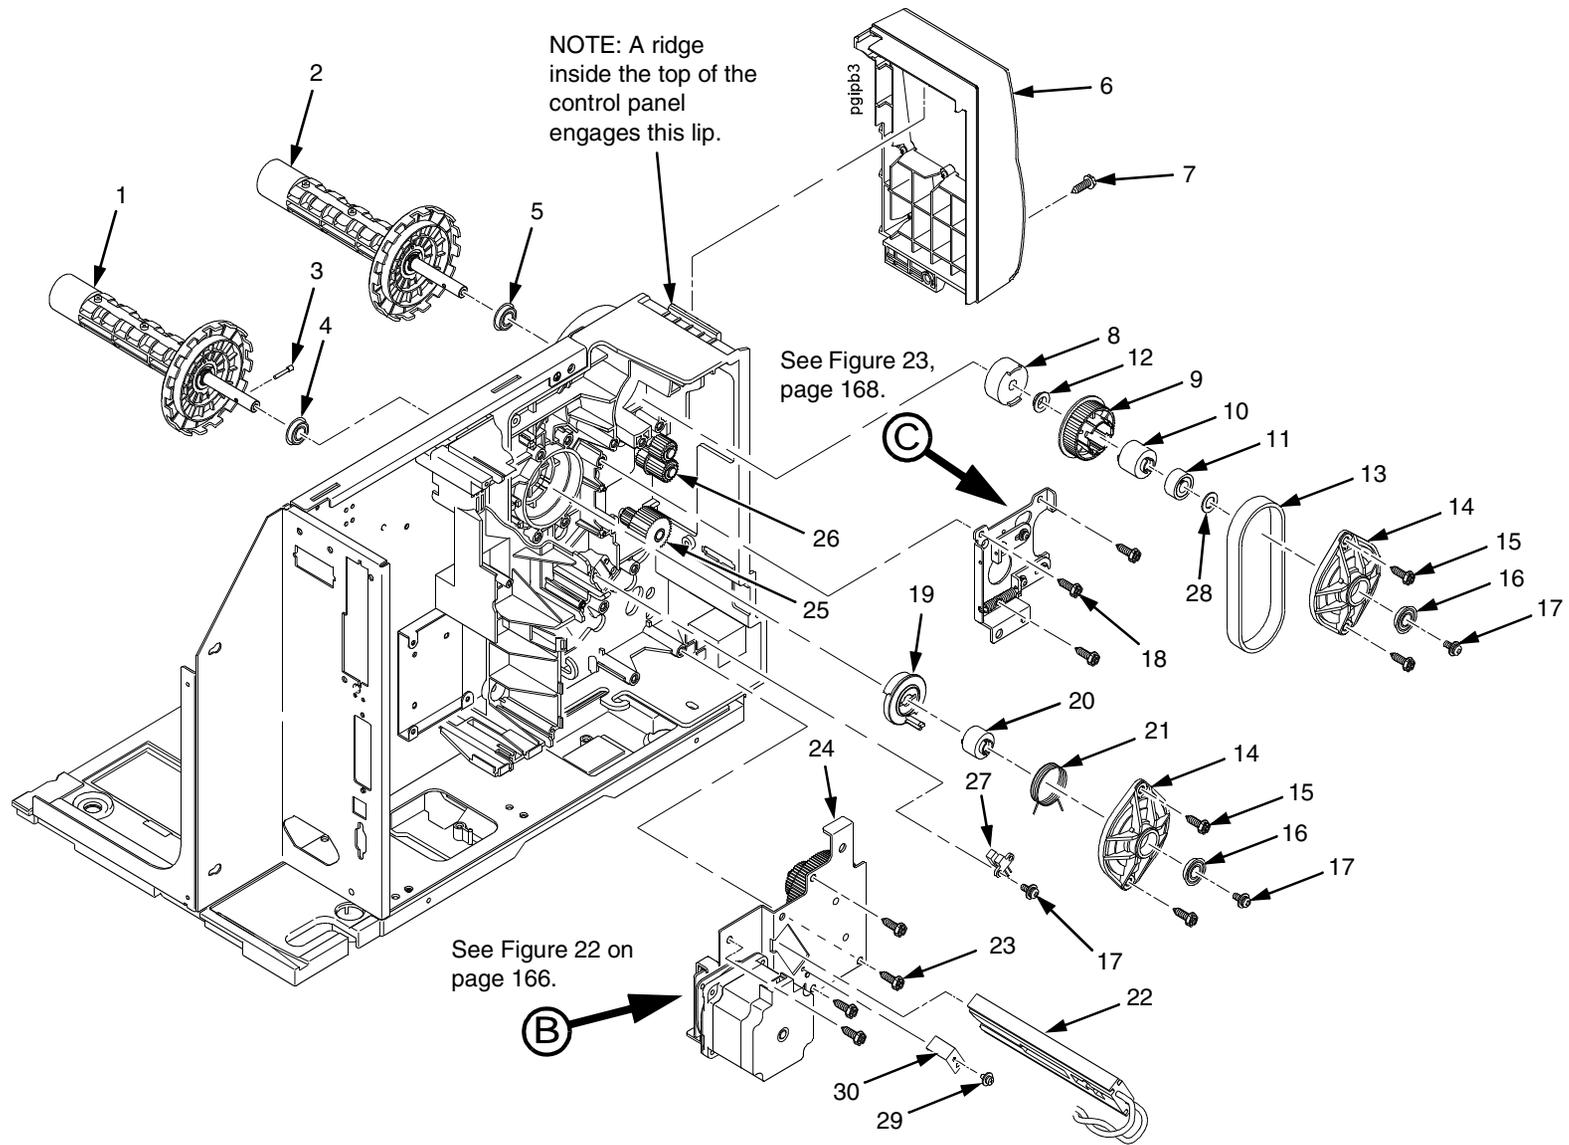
This illustration is an exploded view of the control panel, belts, gears, drive motor, ribbon spindles, and sensor assembly.
